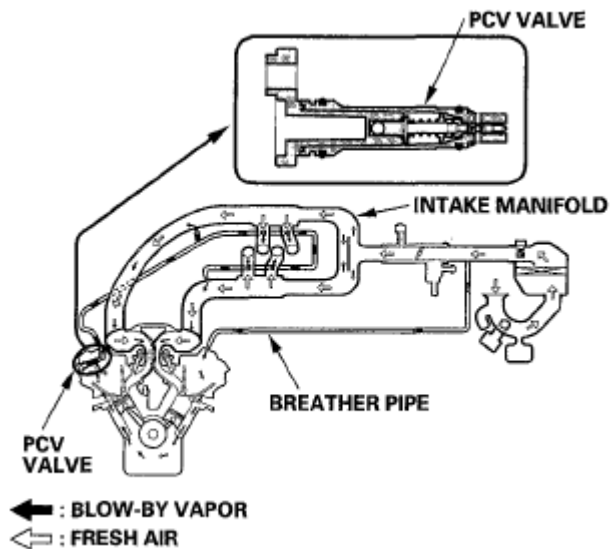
Identifying Positive Crankcase Ventilation Valve And Breather Pipe
